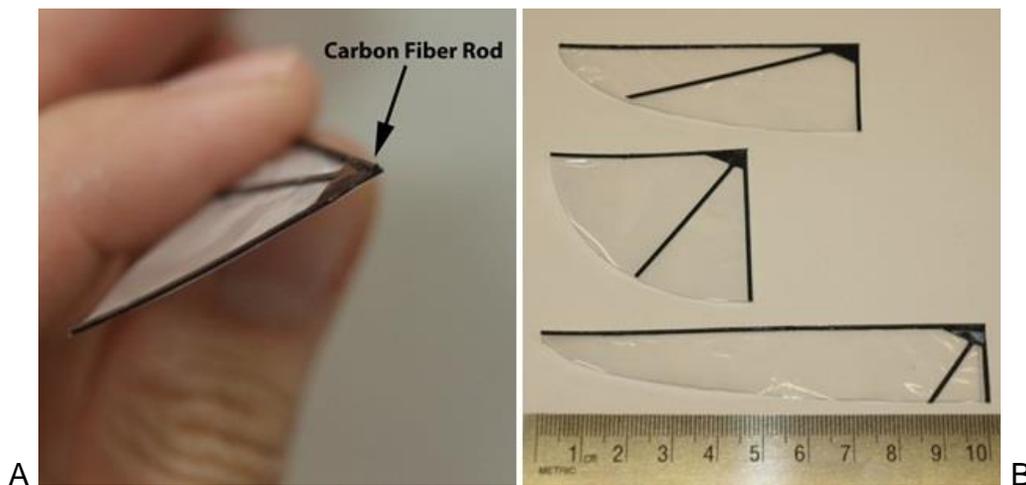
Completed plastic frame wings with the carbon fiber rod, frame, and CAPRAN<sup>®</sup> already combined. A) 0.5 mm circular carbon fiber rod glued to LE. B) Size and shape example of completed wings shown with a metric [cm] scale. Photos courtesy of Kelvin Chang.
